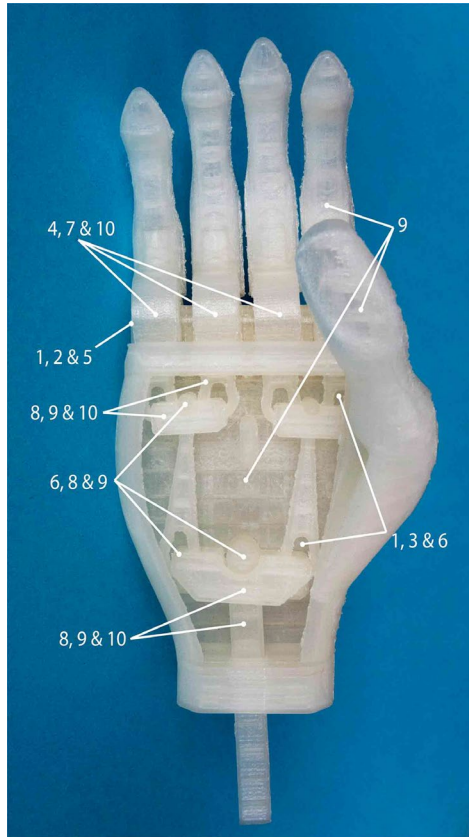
Non-assembly prosthesis prototype after support removal. Each number represents the corresponding design principle used to build the part.
